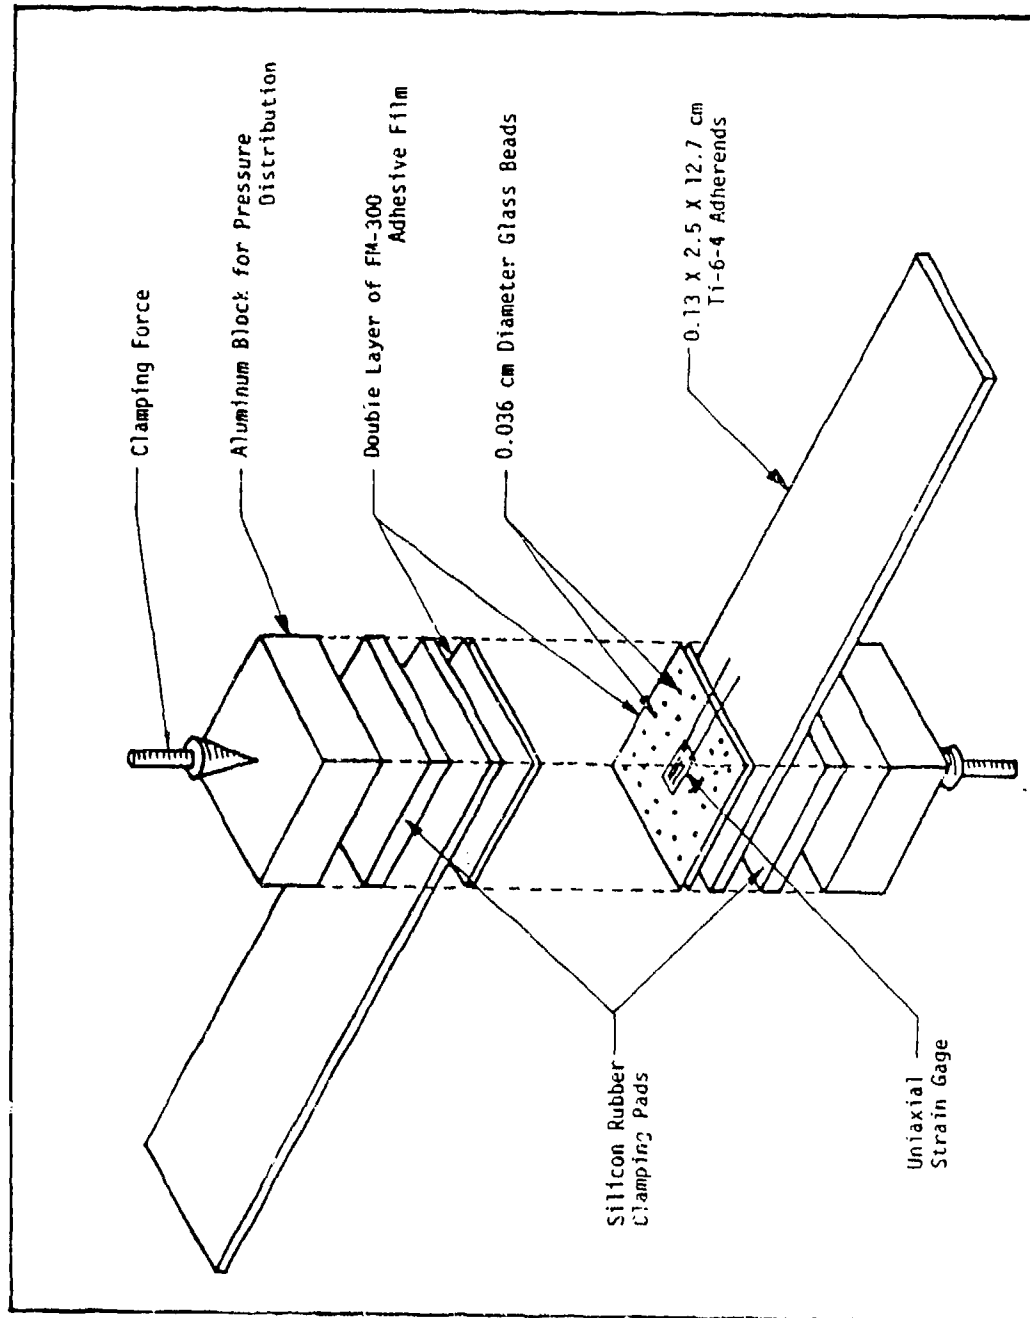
Exploded View of Single-Lap Joint Fabrication.
